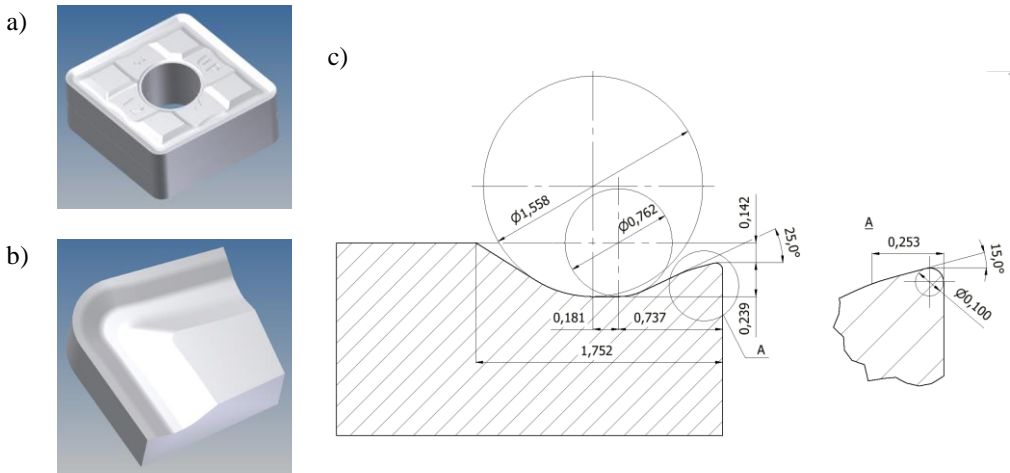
CAD model of Kennametal cutting insert type CNMG 120412-UP (a), the model of tool edge used in FEM simulation (b) and dimensioned cross-section of the tool model (c).
